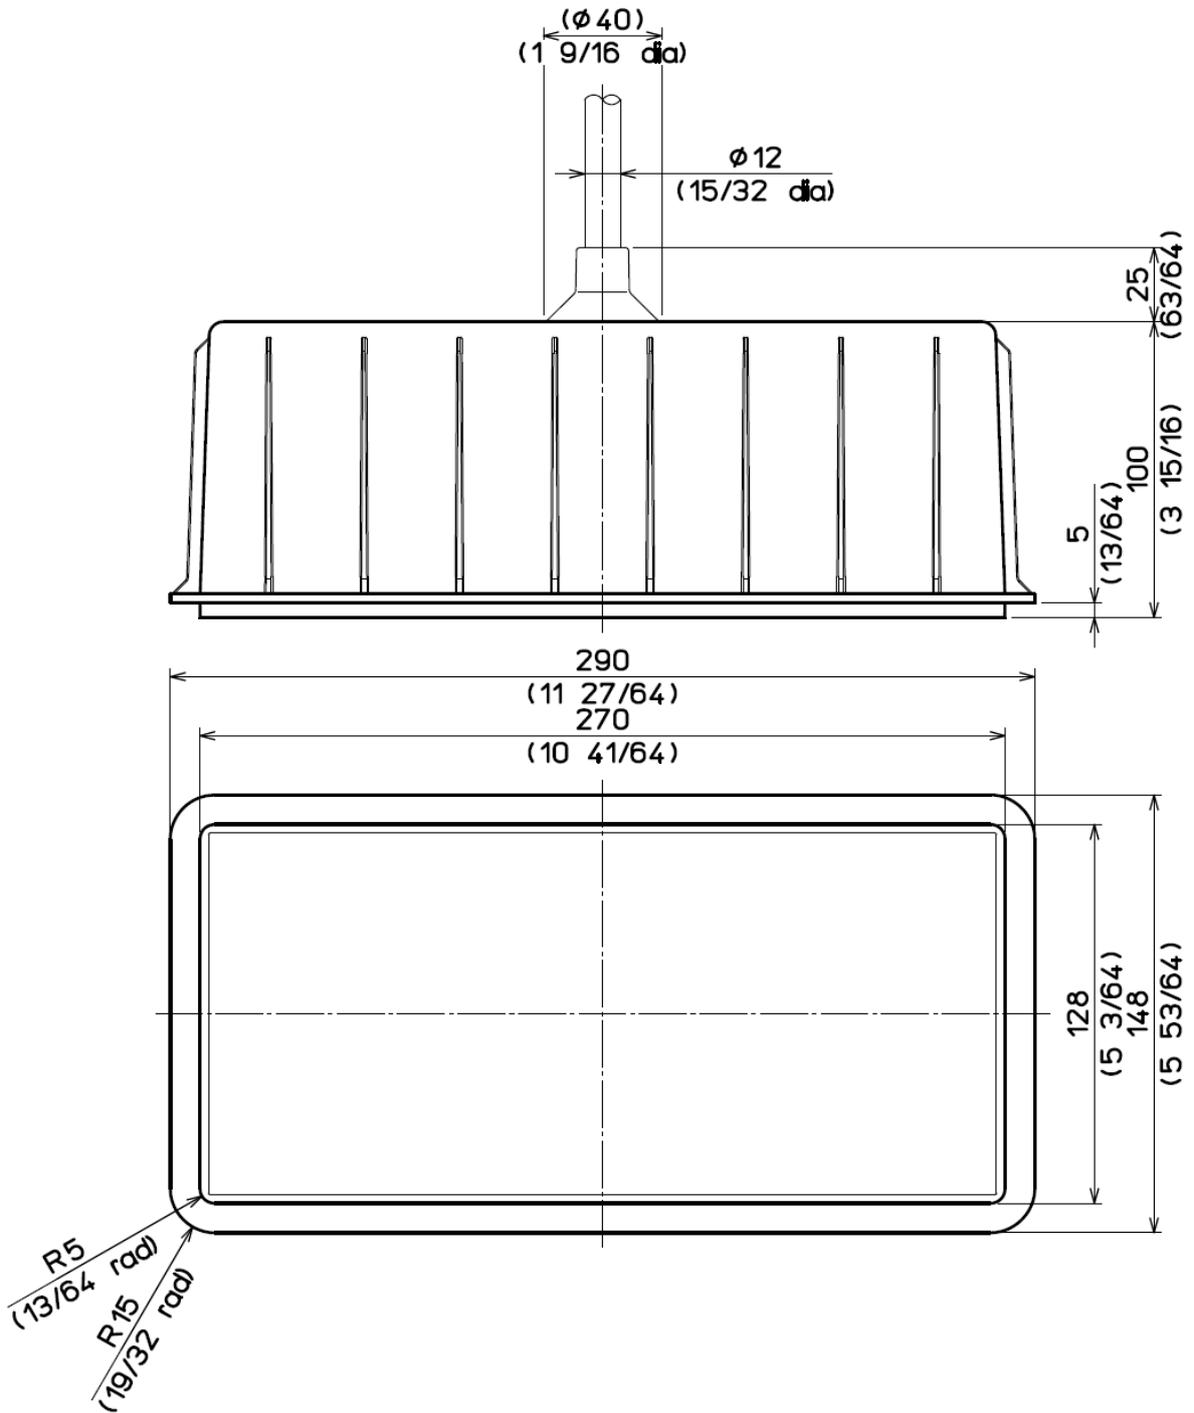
Outline dimensions of a transducer (TD380-K)
